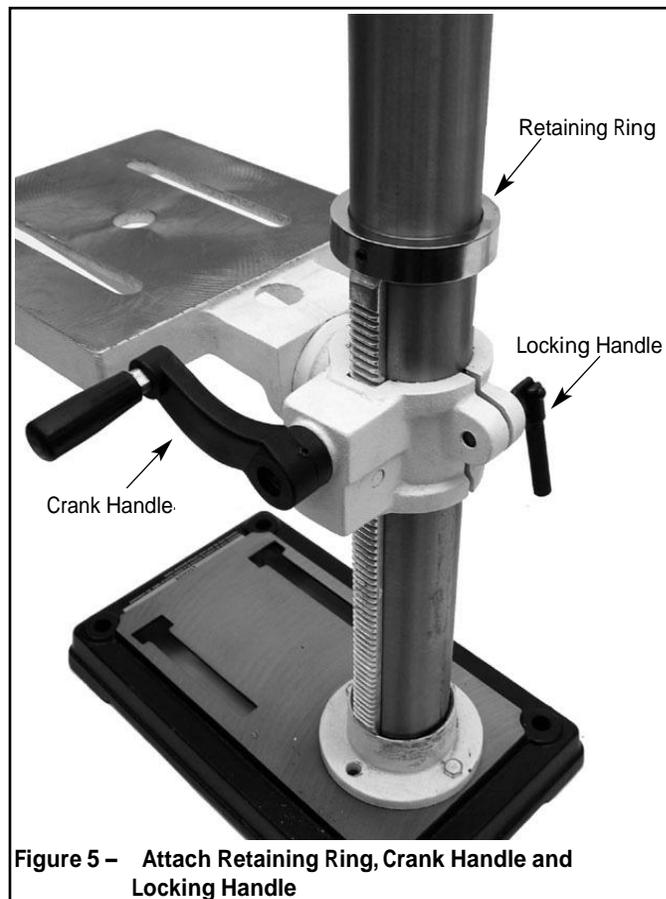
Attach Retaining Ring, Crank Handle and Locking Handle
